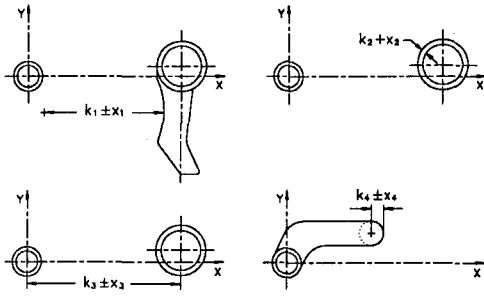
Drawings of kinematic variable and tolerance variable
